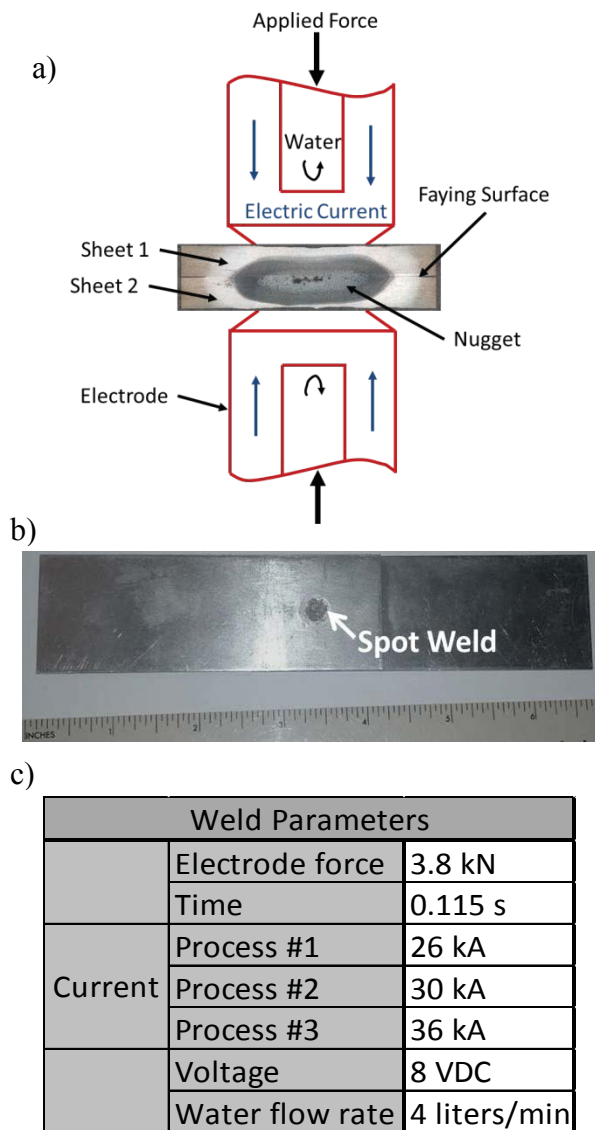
a) Schematic drawing of resistant spot welding (RSW); b) A RSW-produced Al6061-T651 lap joint; and c) weld parameters.
